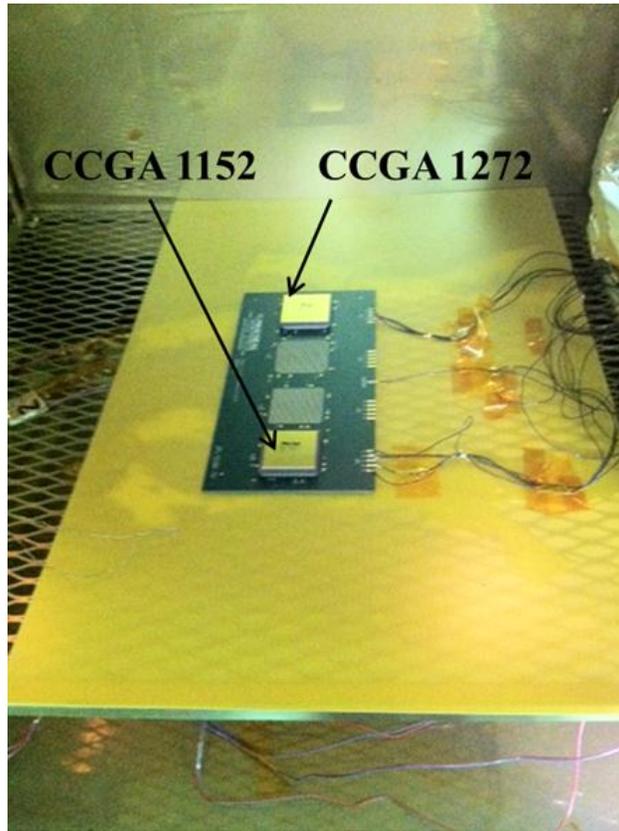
Optical photograph of the test board assembled with CCGA1152 and CCGA1272 packages
